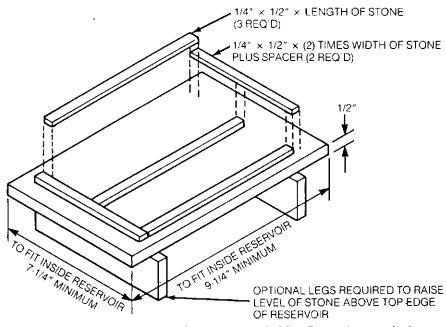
Construction details of a water stone holding fixture that sets in the water reservoir.
